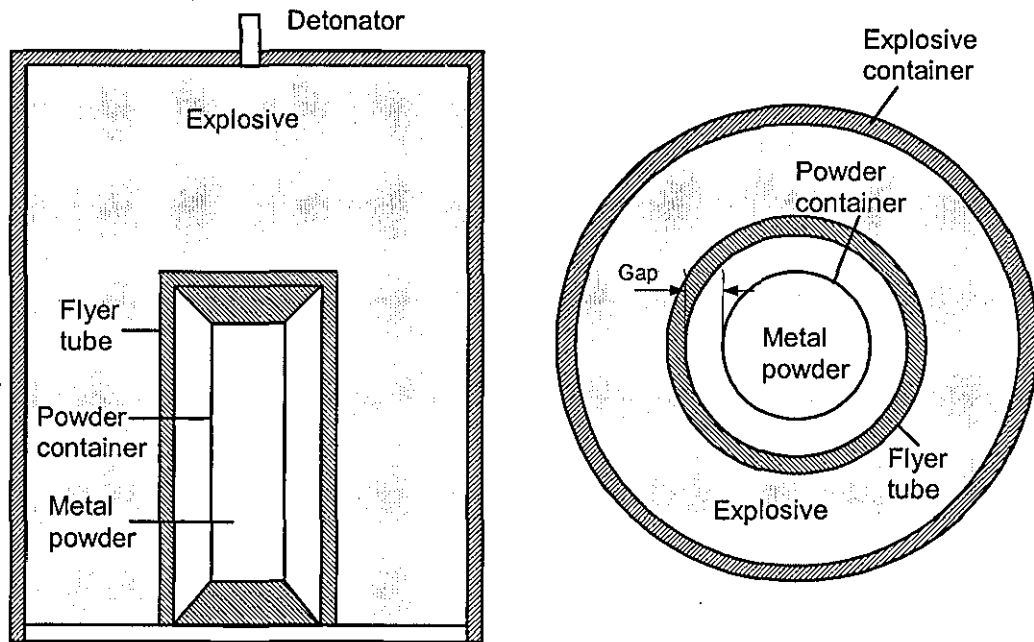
Cylindrical flyer implosion technique using explosive.
